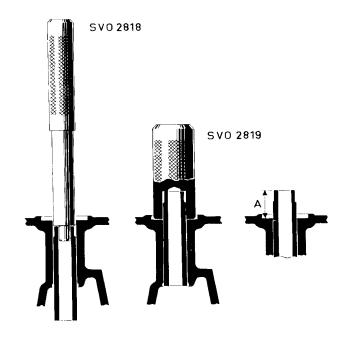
Replacing the valve guides A = 17.5 mm (0.689")
